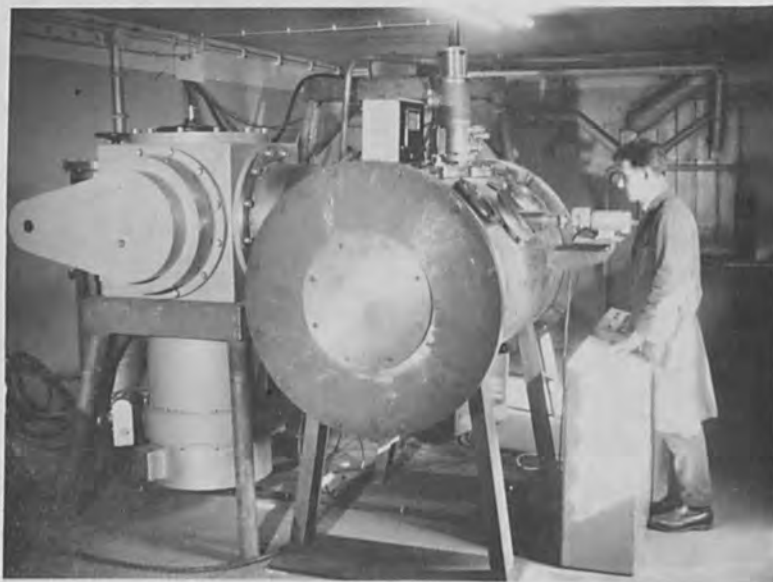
Receiver of the ZIS 456 electron-beam welding unit.
